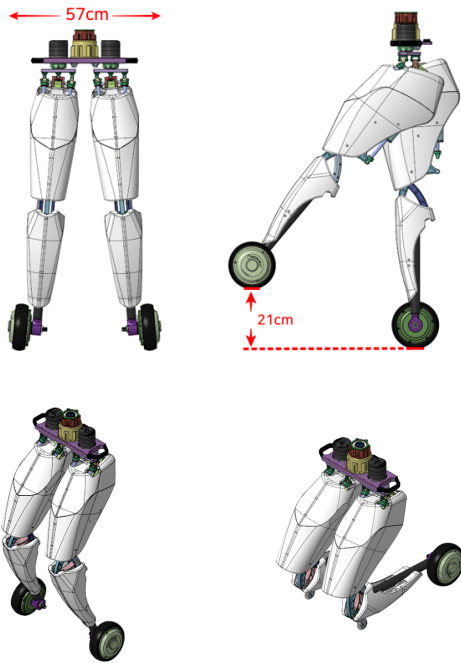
Overall dimensions (top) and transforming mechanism utilizing caster wheels (bottom) of the modified WBR.
